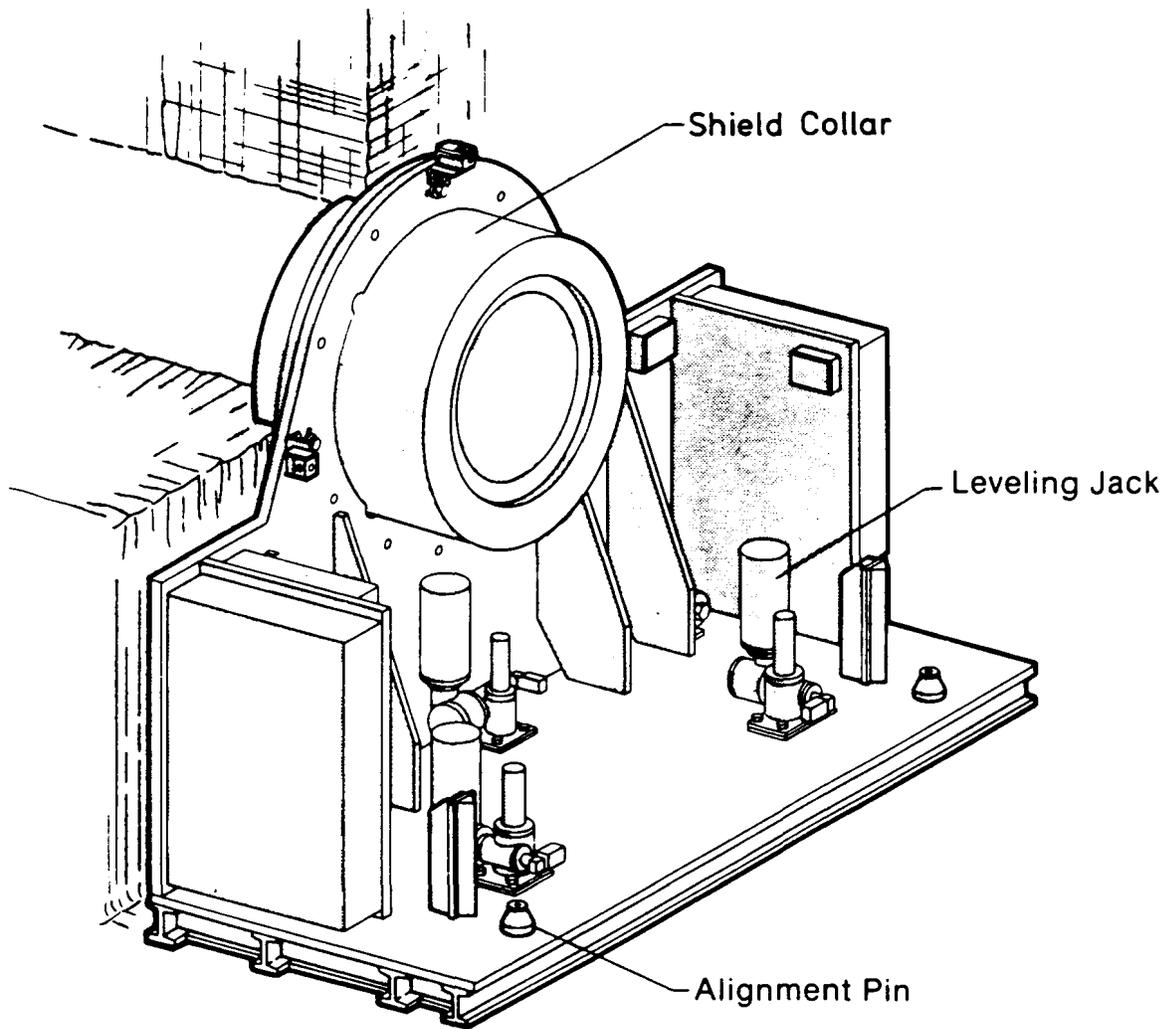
, RH TRU Waste Handling Facility Cask Unloading from Cage
